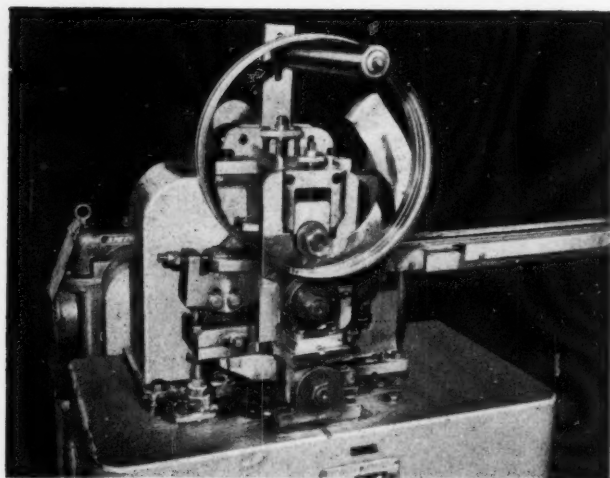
The Shroud Strips are Formed to the Required Circular Shape on this Machine
